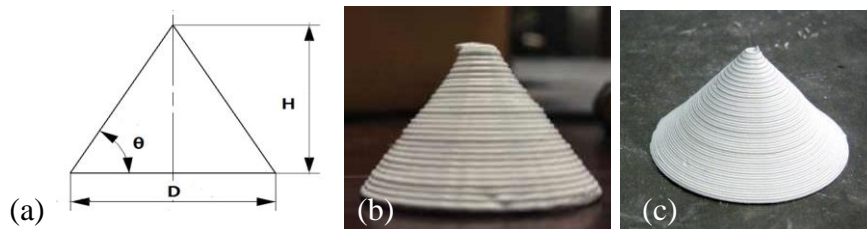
Hollow cone: (a)  $\theta$  is the minimum deposition angle, D is the bottom diameter and H is the height of cone, (b) fabricated cone at 40°C and (c) fabricated cone at -20°C [18].
